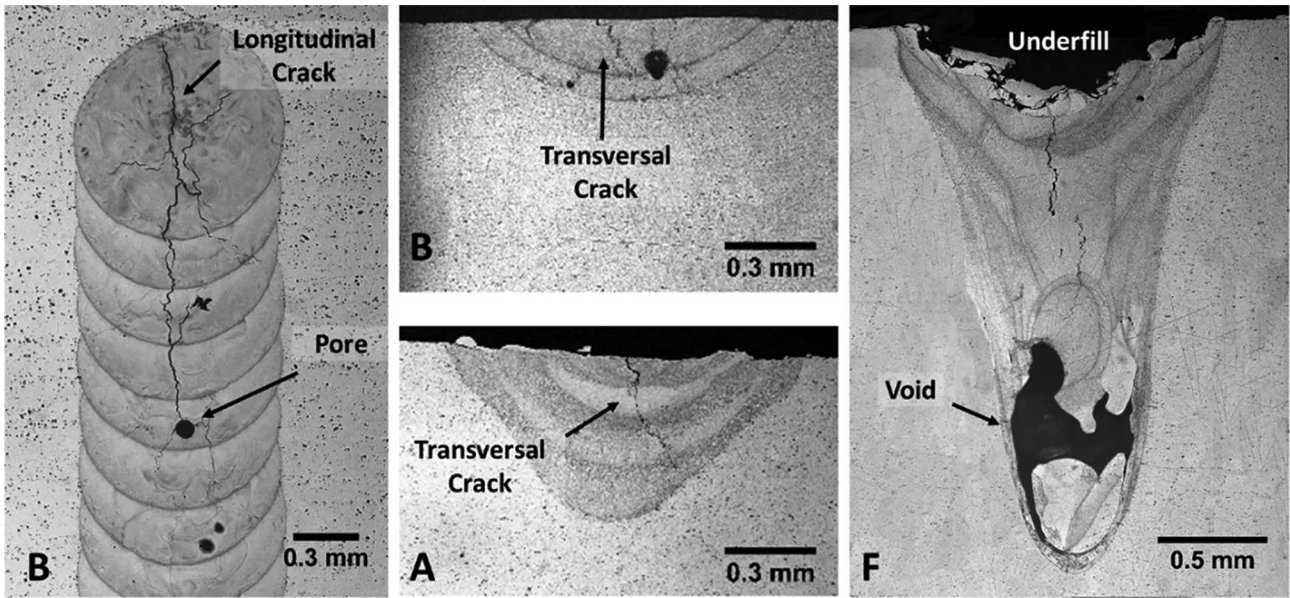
Optical macrographs of the AA5083 weld beads (conditions from the Table 4) showing pores, underfill, longitudinal and transversal cracks
